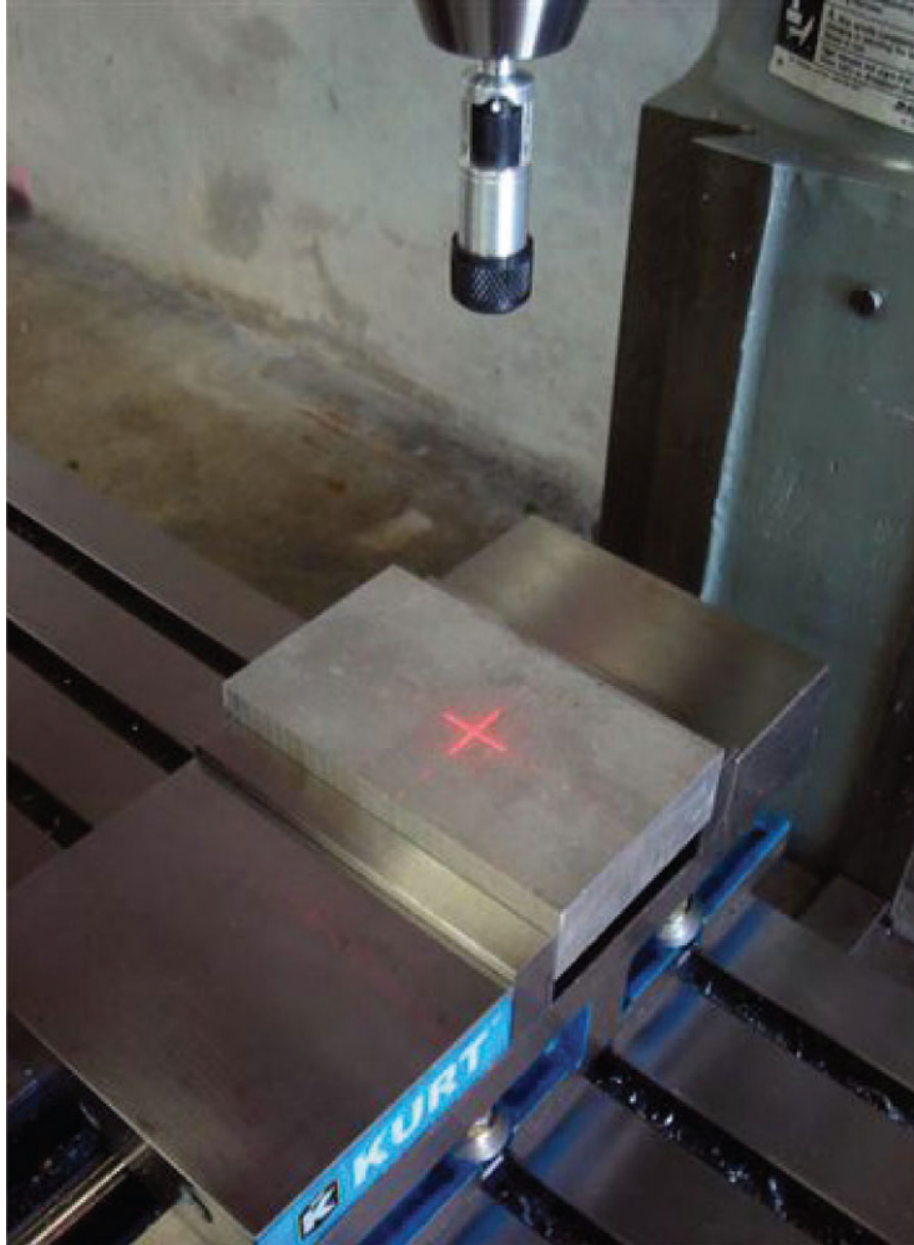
A Laser Centre/Edge Finder projecting a cross-hair pattern on to a workpiece. (Photo: SDA Manufacturing)
